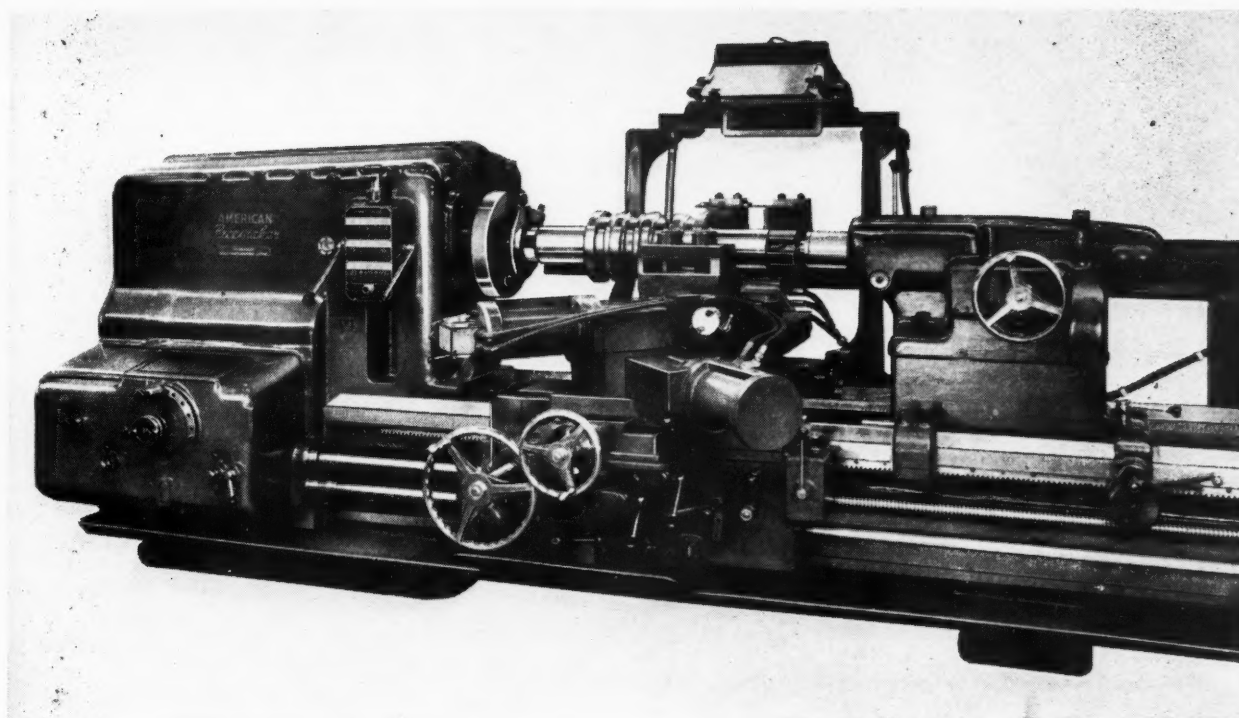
Hydraulic roll-duplicating lathe brought out by the American Tool Works Co.
